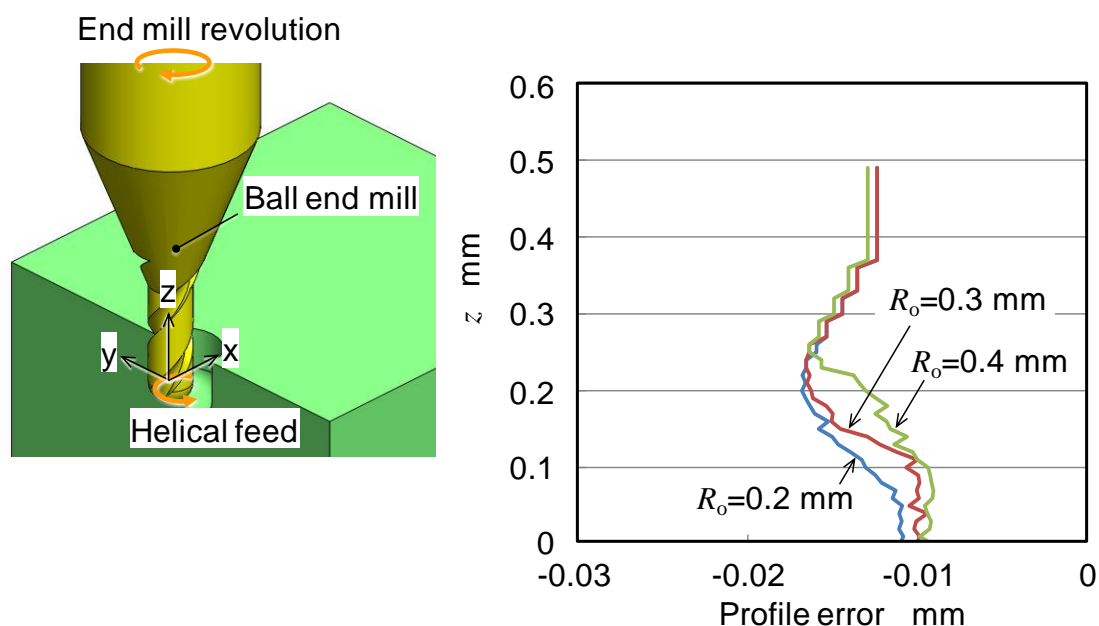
31 Relationship between helical feed radius R_o and Profile error of the machined surface for CCW (Down milling), flank wear $VB=0.01\text{mm}$, and helical feed pitch $p_h=0.05\text{mm}$.
